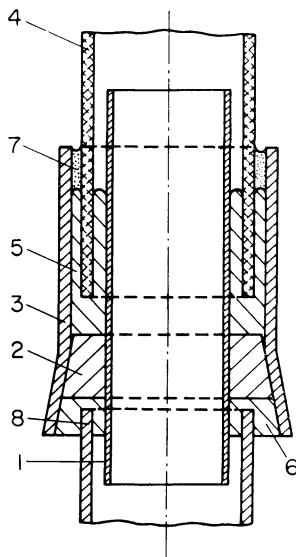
Glass–metal seal with soldering alloy placed in a channel between concentric tubes. After Archer⁴⁶ (*Courtesy of The Institute of Physics and The Physical Society, London*)
